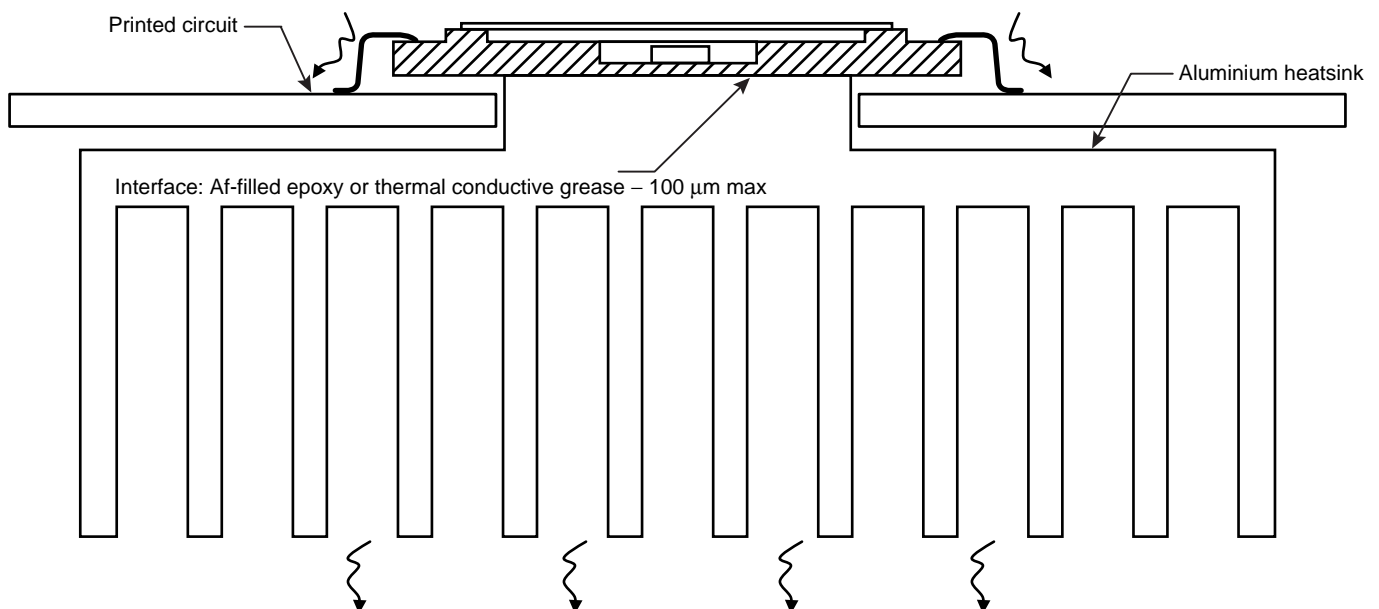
TS8308500GL/TS8388BGL/TS83102G0BGL Heat Sink Assembly Method
